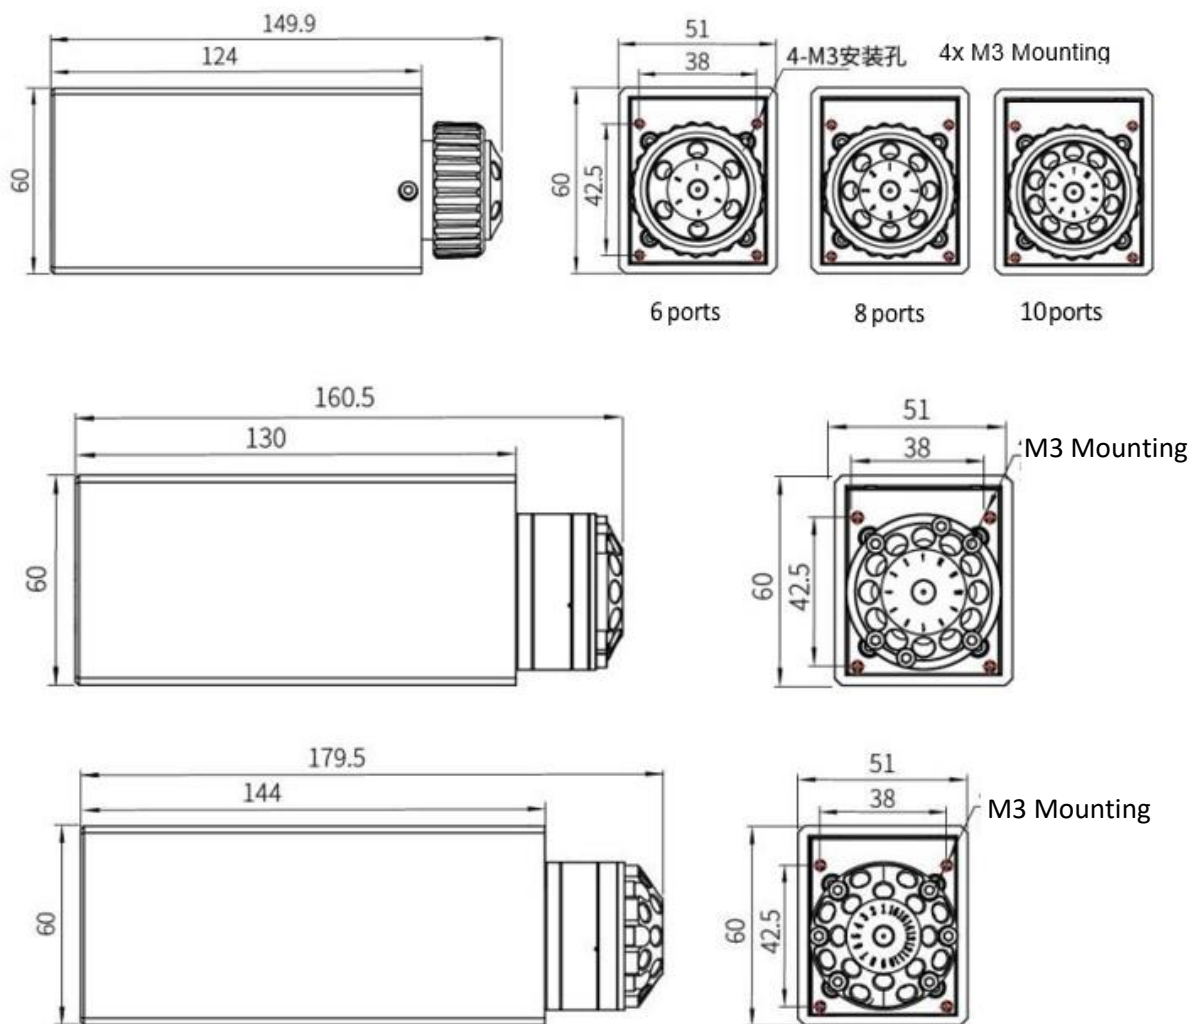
Structure Dimensions of 6/8/10-Ports Electrical Rotary Valves (Unit: mm)
